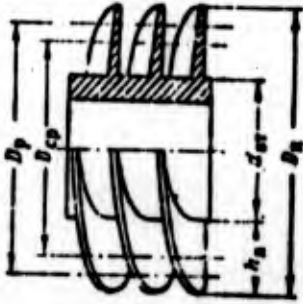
Spiral-screw wheel (screw conveyor).
